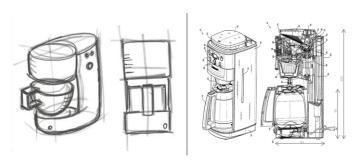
Coffee Machine sketch Vs Coffee Machine technical drawing.
